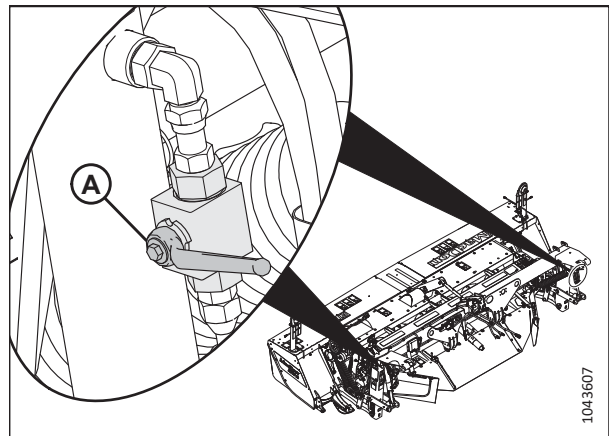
Cylinder Lock-Out Valve – Closed Position
